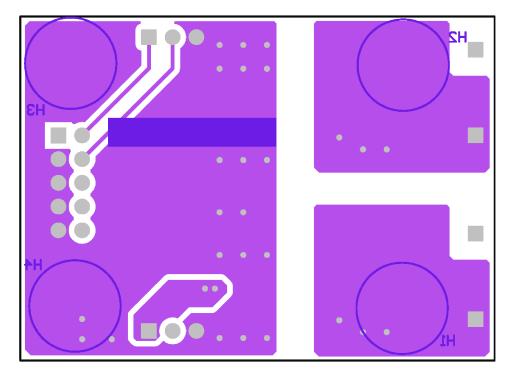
ISO1211EVM PCB Layout—Bottom Layer
